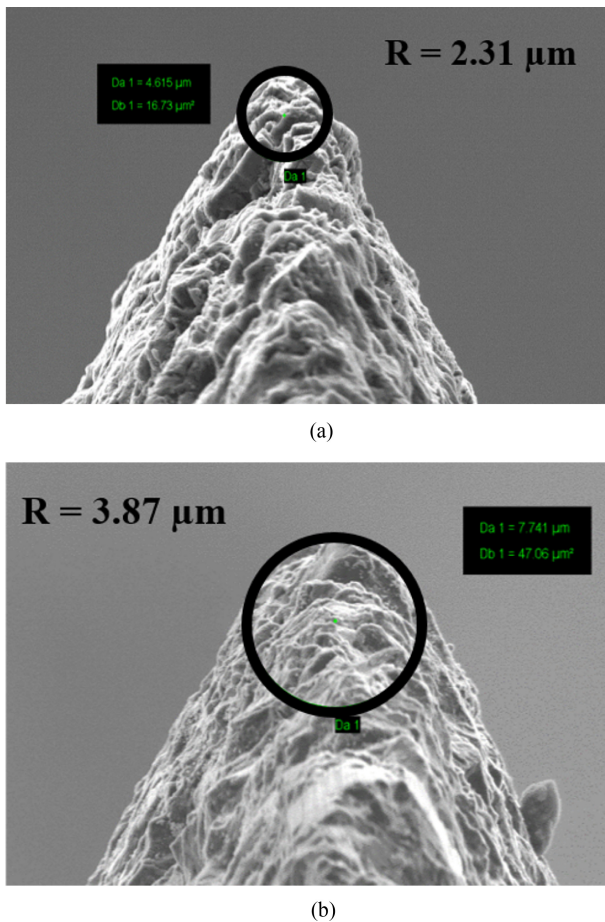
SEM image of V-shape disk tool (a) before machining and (b) after machining
